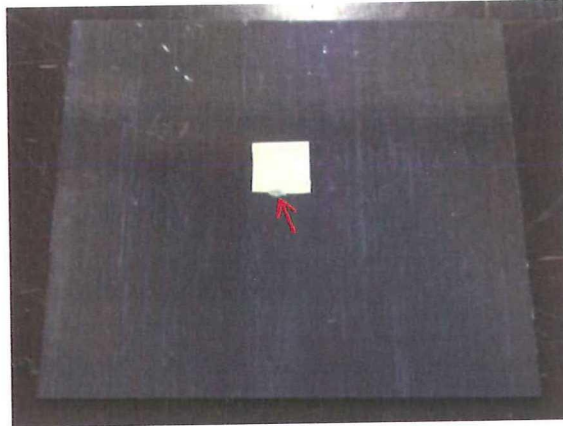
Flat square 1 [cm²] ED plunge welded to the lower composite. The plunge weld is indicated by the red arrow.
